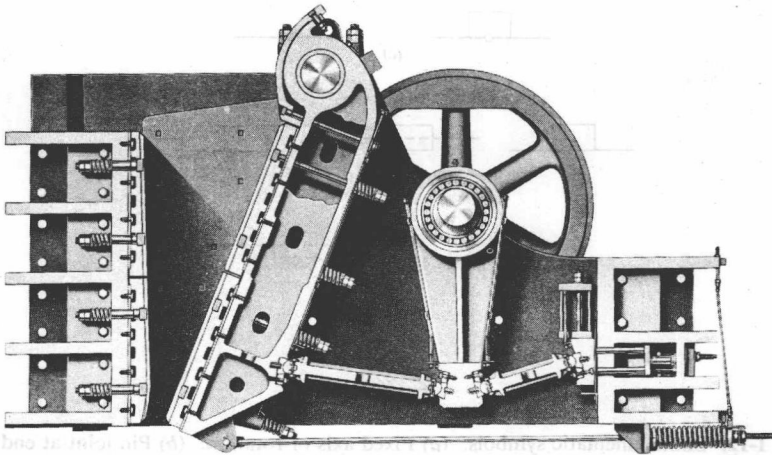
Jaw crusher mechanism. (Courtesy Allis-Chalmers Manufacturing Co., Milwaukee, Wisc.)
